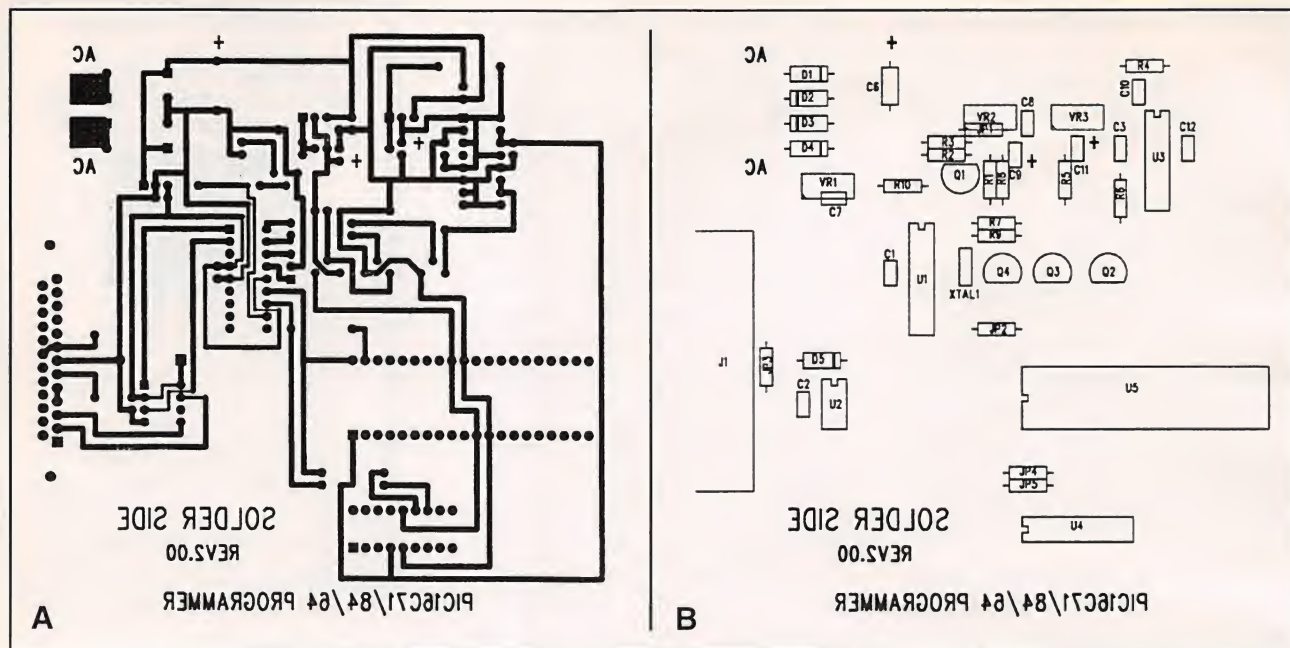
Shown here are (A) actual-size etching-and-drilling guide for Programmer's printed-circuit board and (B) wiring guide for board.
